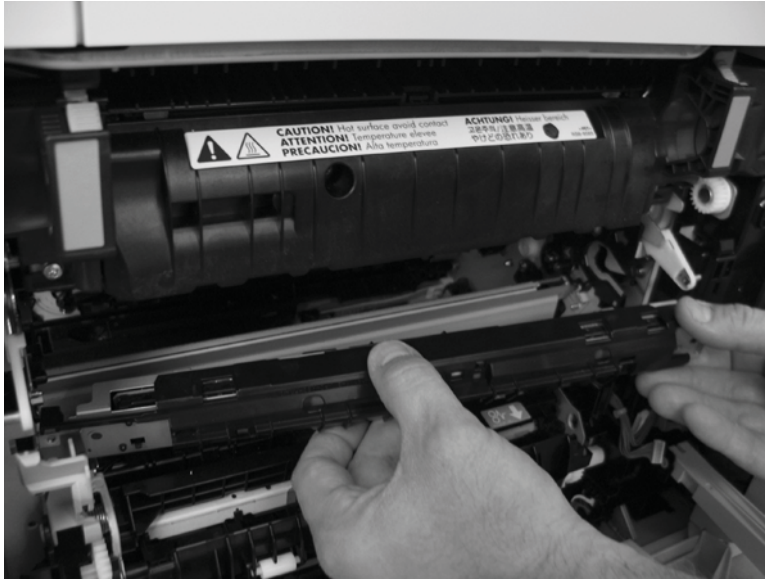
Remove the RD sensor assembly (6 of 7)
